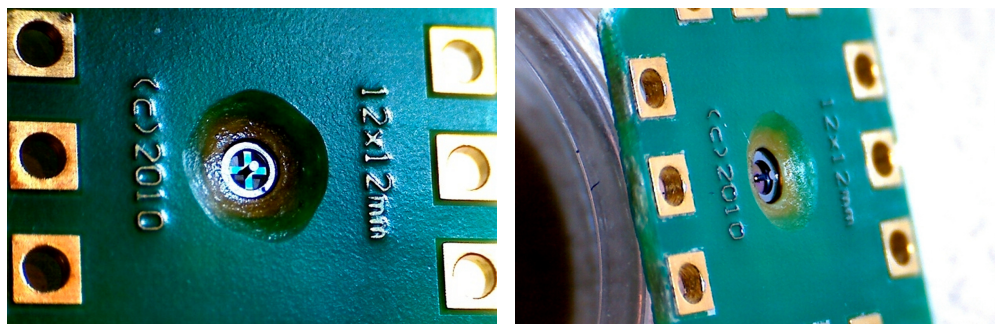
3D micro force measuring chips with perforated (left) and full membranes (right). Both versions are fabricated in SOI wafers and assembled in a PC board for testing. Size of the sensing structure: 1 mm diameter.
